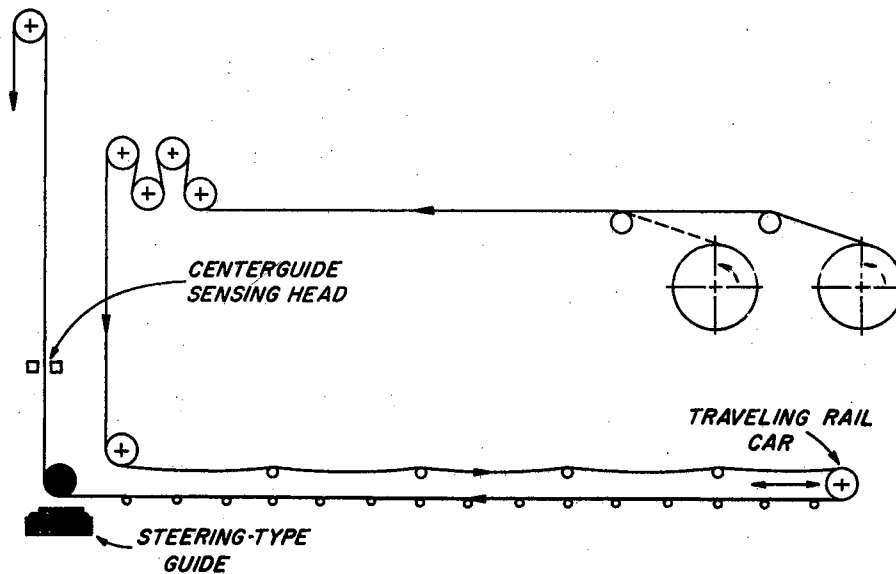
Steering Guide for Steel Strip With Support Rollers in Entering Span.
